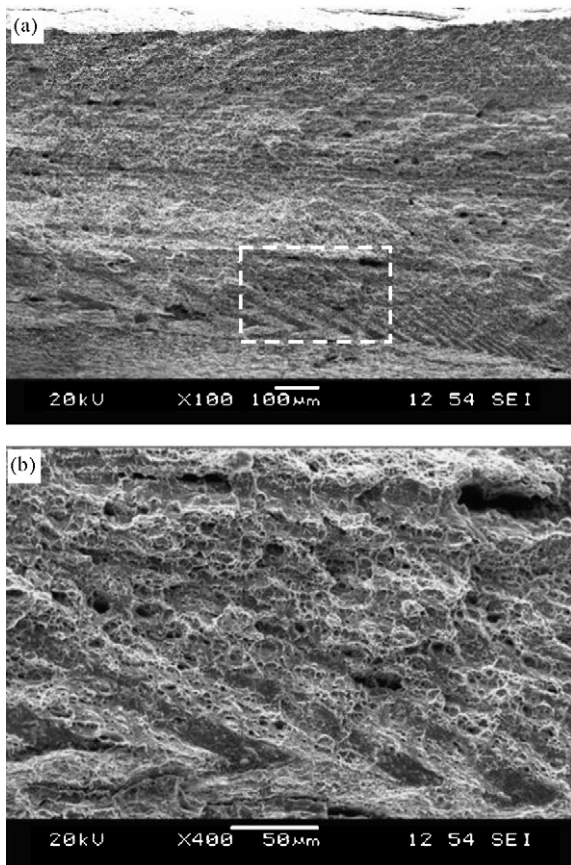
Fatigue fracture surface of a welded sample tested at a stress amplitude of 250 MPa (a) deformation bands near both specimen surfaces, and (b) a magnified view of the boxed area in (a).
